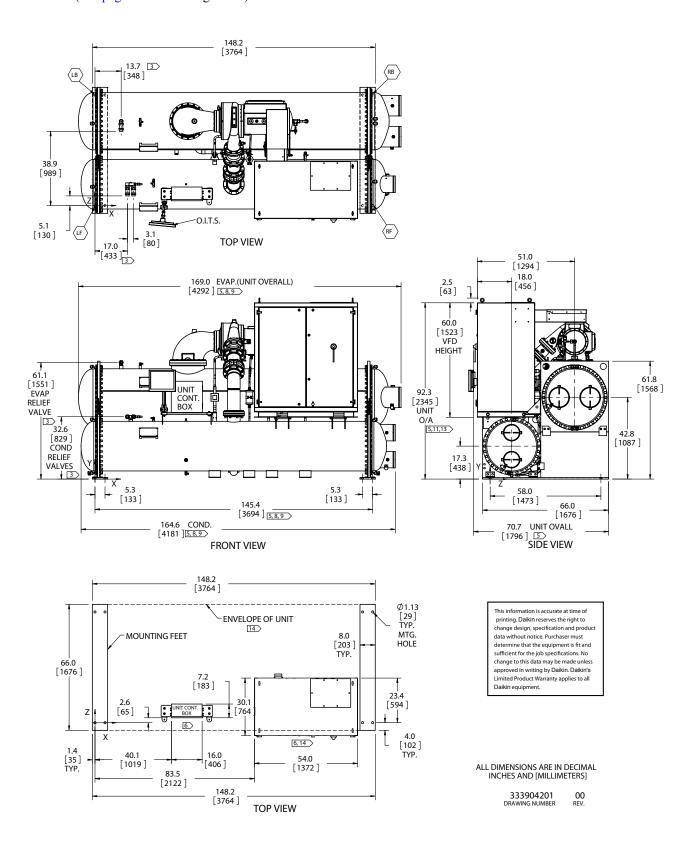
WME0500 - E30C30 - 2 pass, M2 Standard Motor (60Hz 440/460/480V ( See page 16 for drawing notes.)
